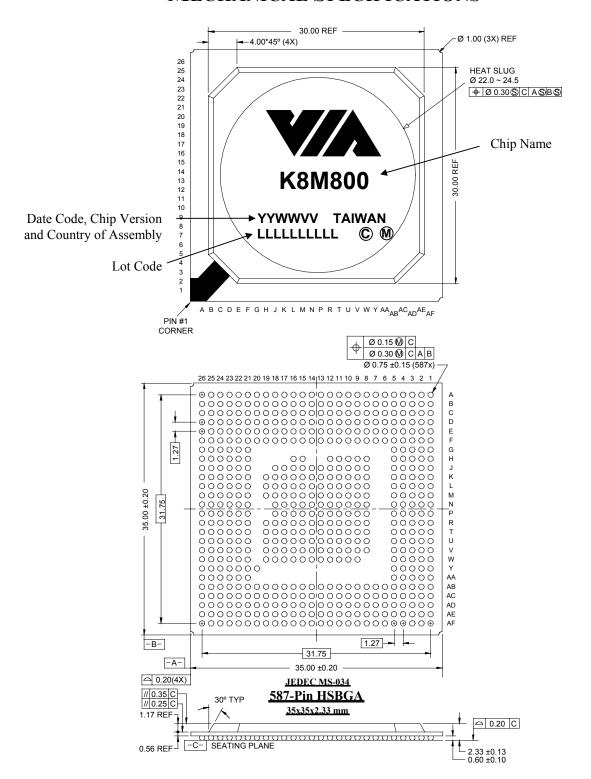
Mechanical Specifications – 587-Pin BGA Package with Heat Spreader
